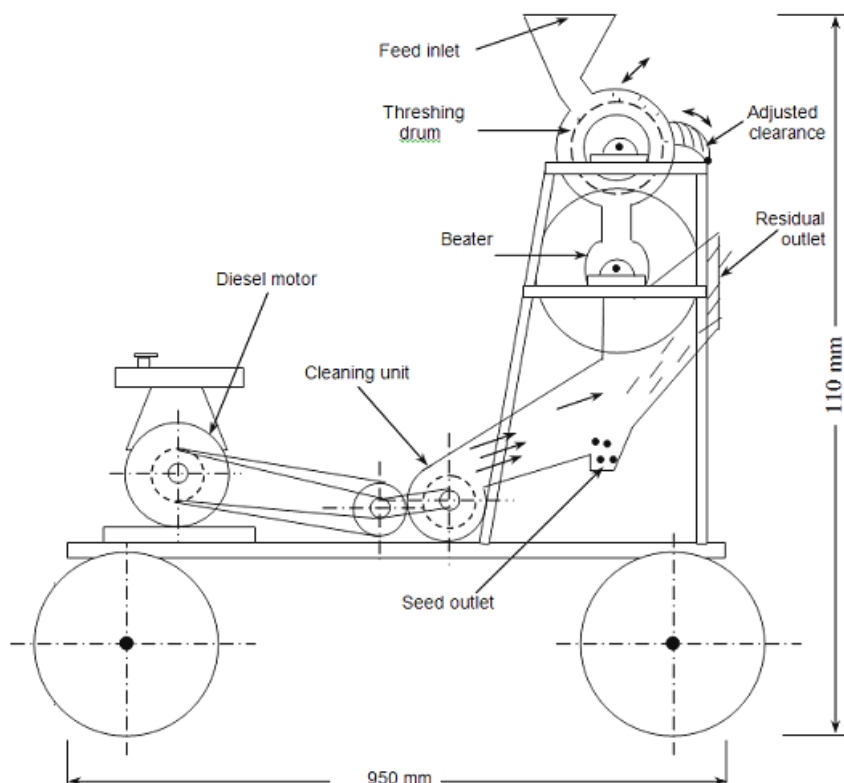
Sketch of the prototype threshing and cleaning machine.
